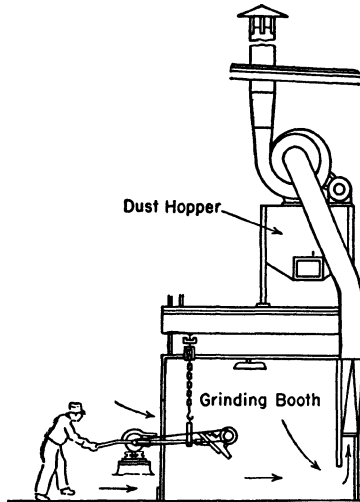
FIGURE VII. Schematic Sketch of Dust-Control Installation for Swing-Frame Grinders (Courtesy American Air Filter Co.)
